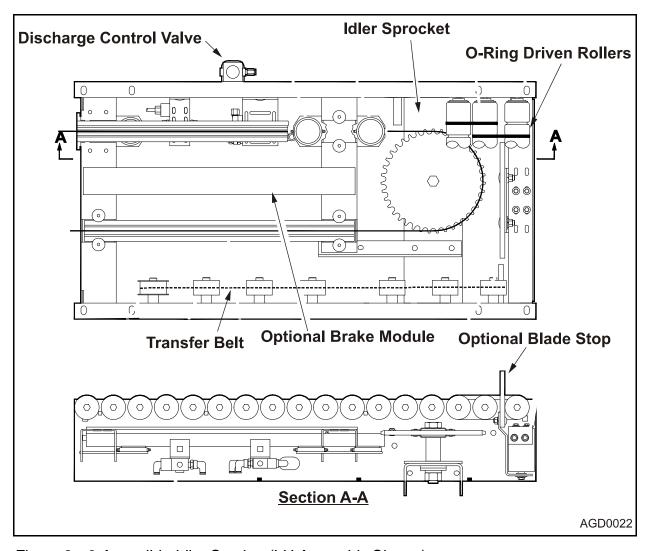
3 Accuglide Idler Section (LH Assembly Shown)
